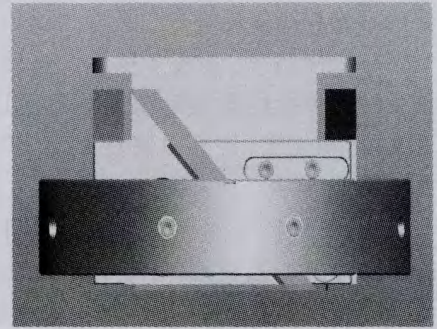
Holding fixture for polishing end face of Nd:YAG slab
